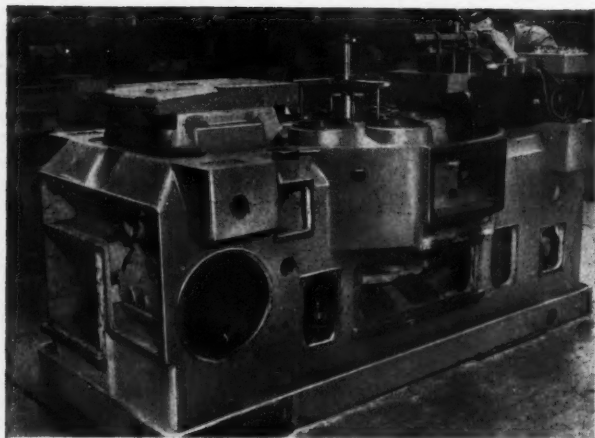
During assembly of Ryder Verticalautos, an 8-in. Auto-Collimator is used to check the accuracy of the table indexing. The base of the machine is completely assembled at this stage, and the table is mounted on its own bearings on a dummy column, with a precision hexagon supported on a spider at its centre. Controlled from the temporary panel seen at the right, the table is indexed and positioned by each location insert in turn. At each position, the deviation of the corresponding face of the hexagon from the correct setting is determined with the Auto-Collimator, which is mounted on a facing slide
